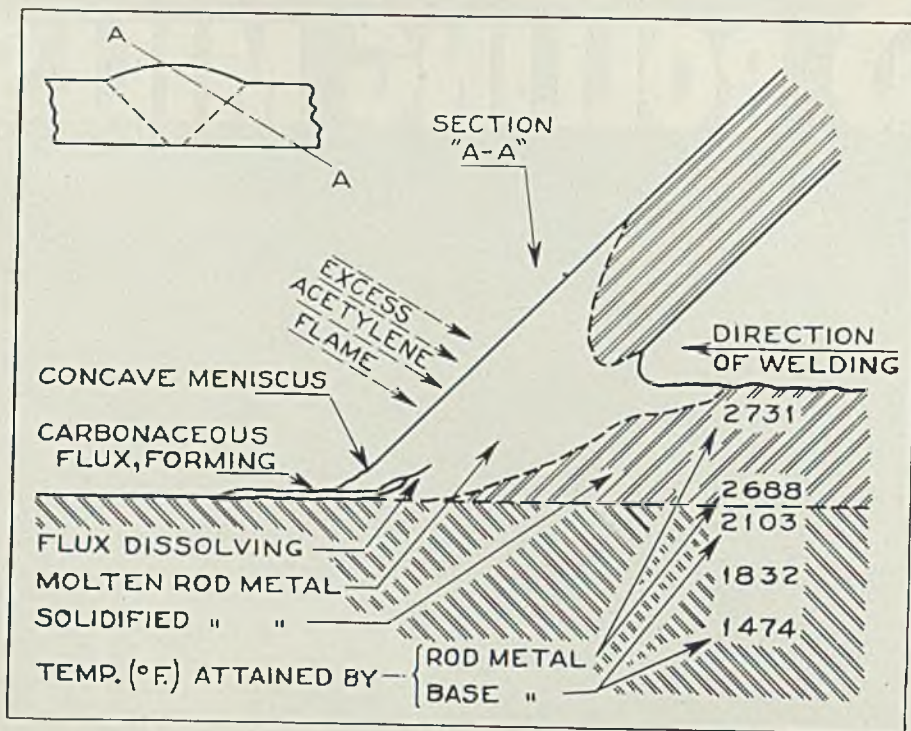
Compare the metallurgical factors for excess acetylene welding with those shown in Fig. 1
